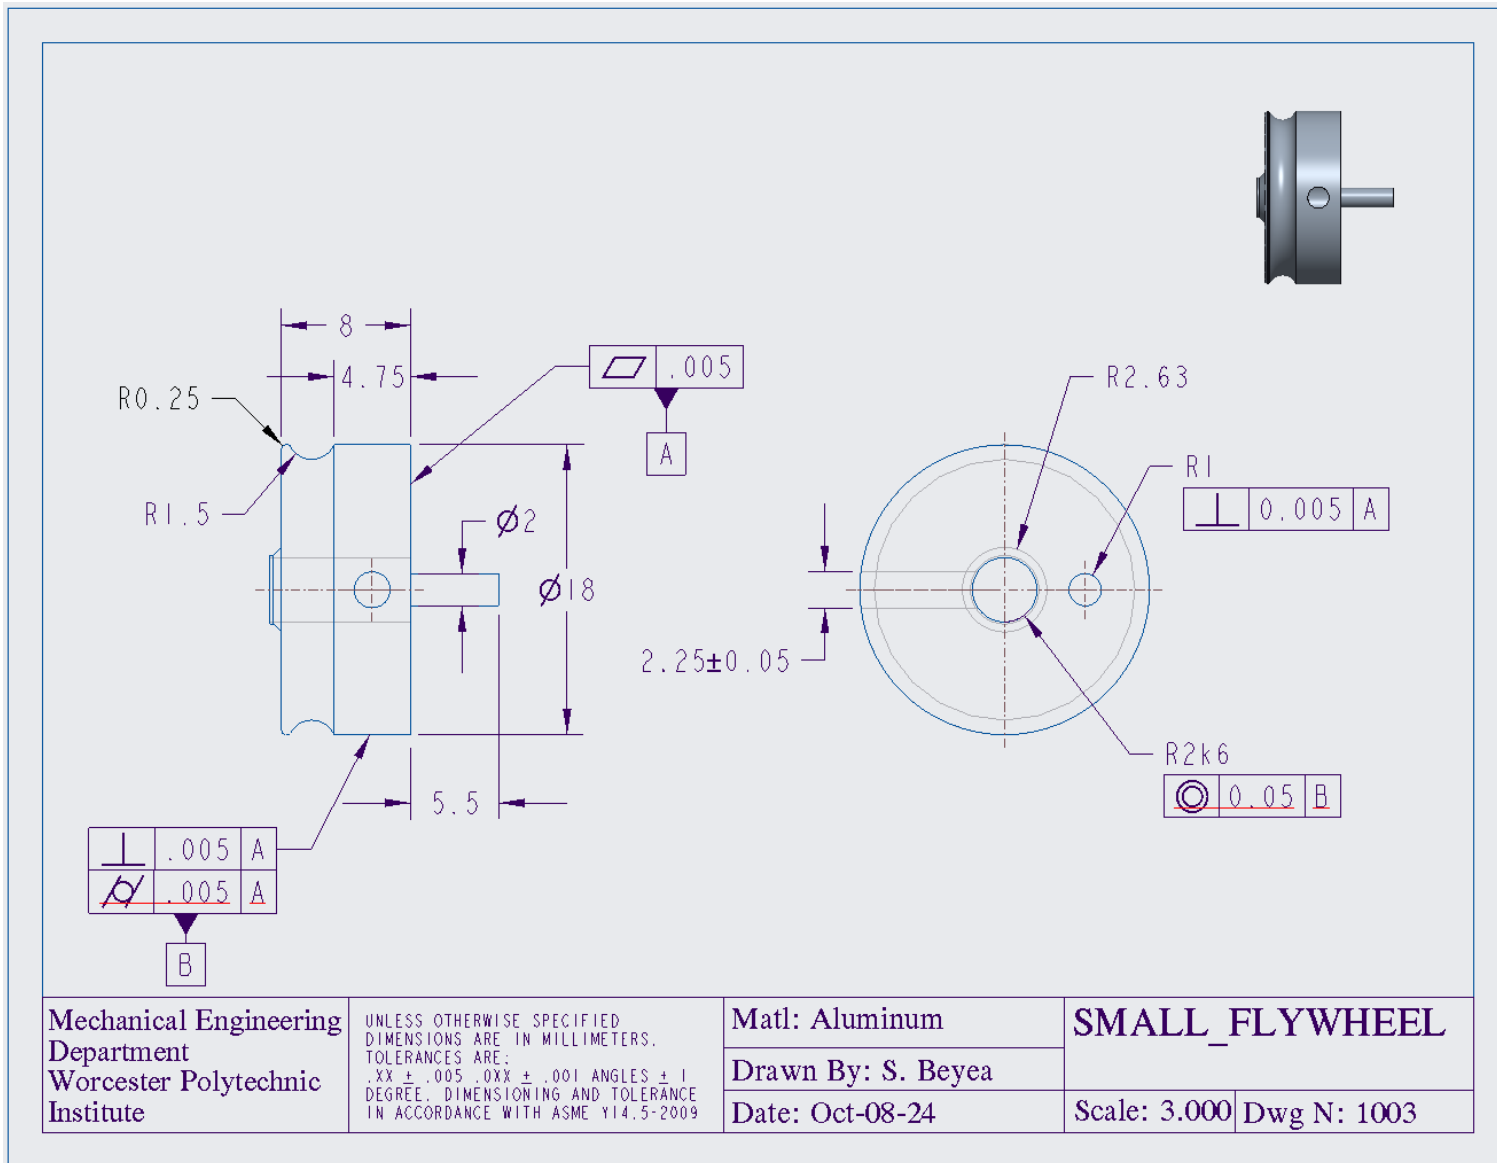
small flywheel which is driven by the displacer piston (hot piston).
